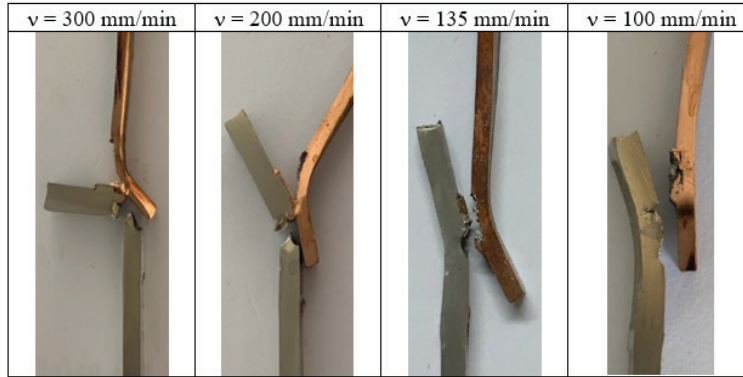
Fracture locations of lap-joint at different welding speeds.
